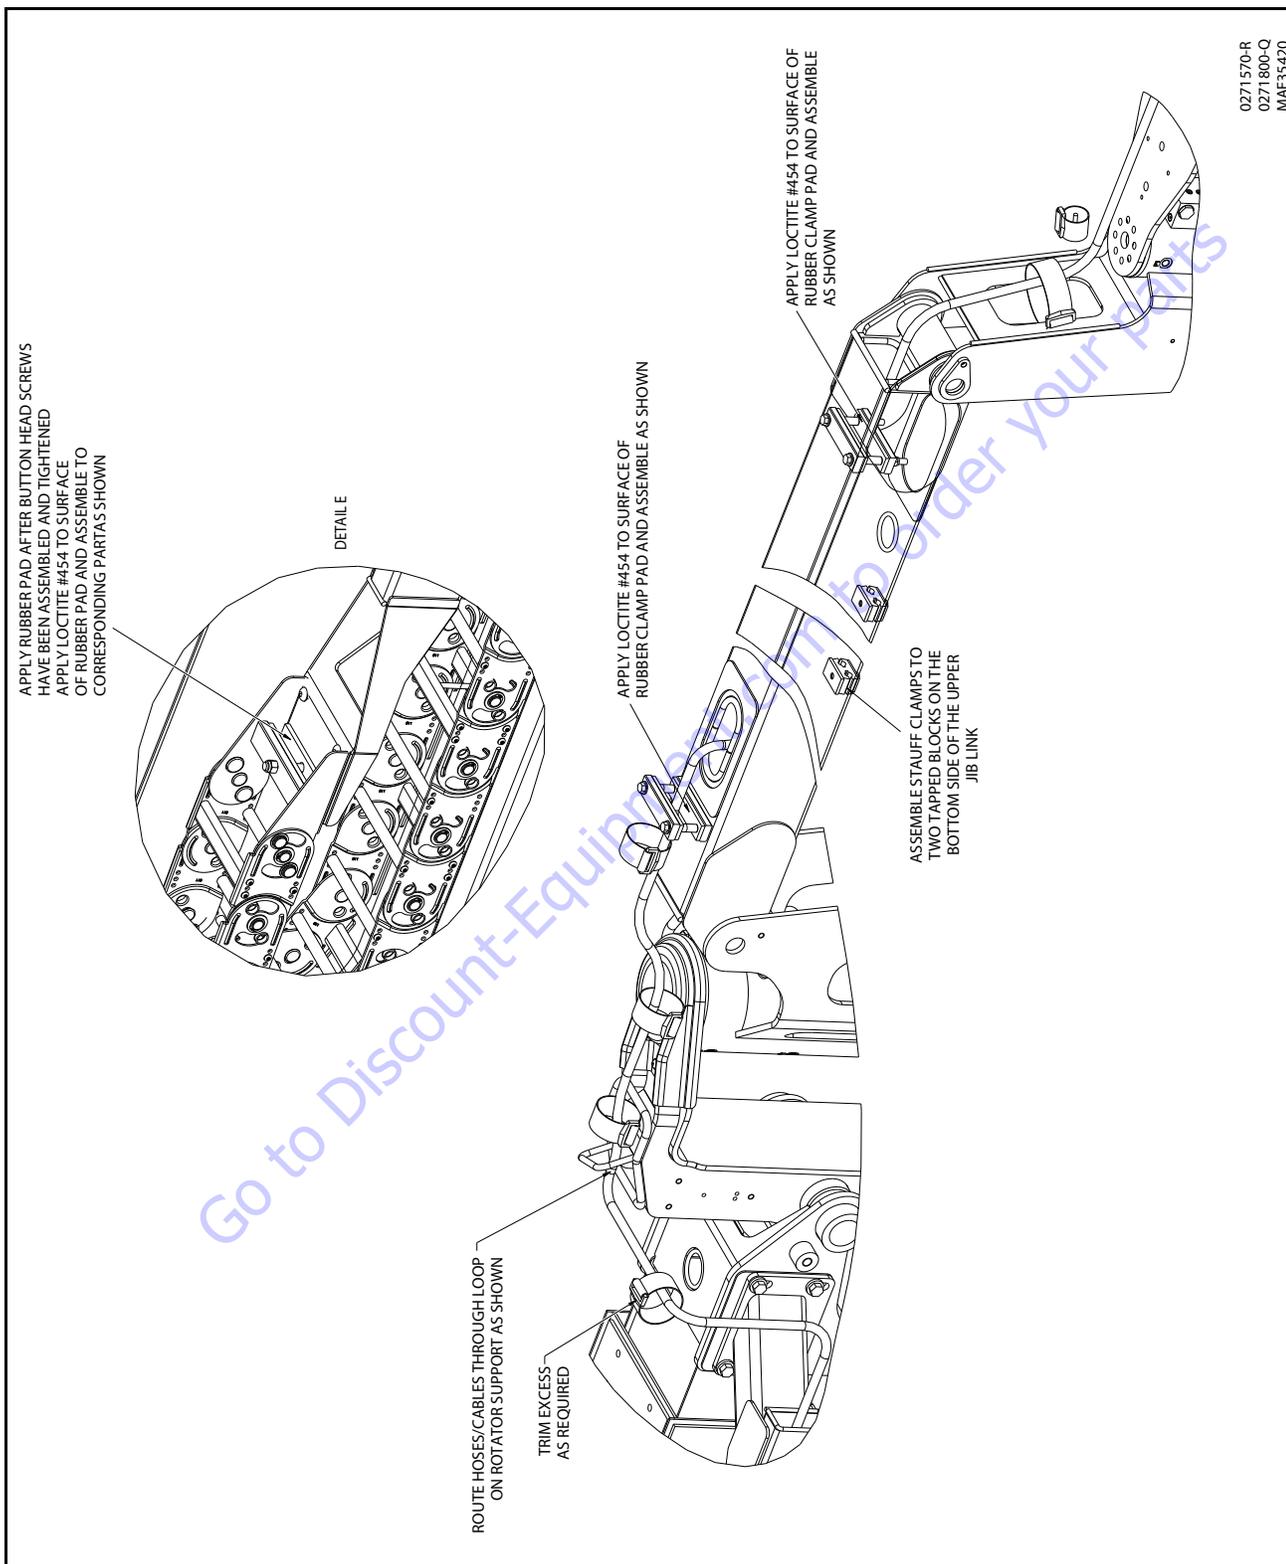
Powertrack Installation - Sheet 3 of 6
